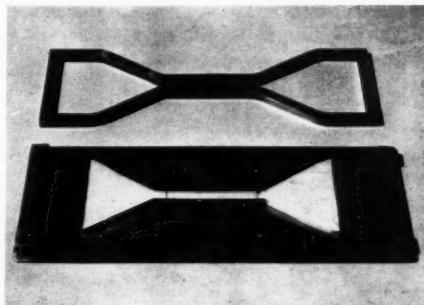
Brass template and mounting plate with dumb-bell shaped rubber test piece in position.
